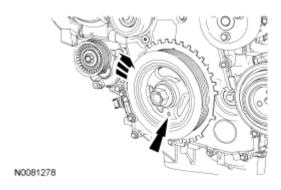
Locating Crankshaft Pulley Bolt Courtesy of FORD MOTOR CO.
